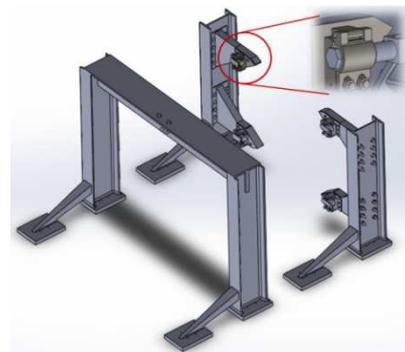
CAD model assembly of testing frame with a zoom in view of the front attachment point
